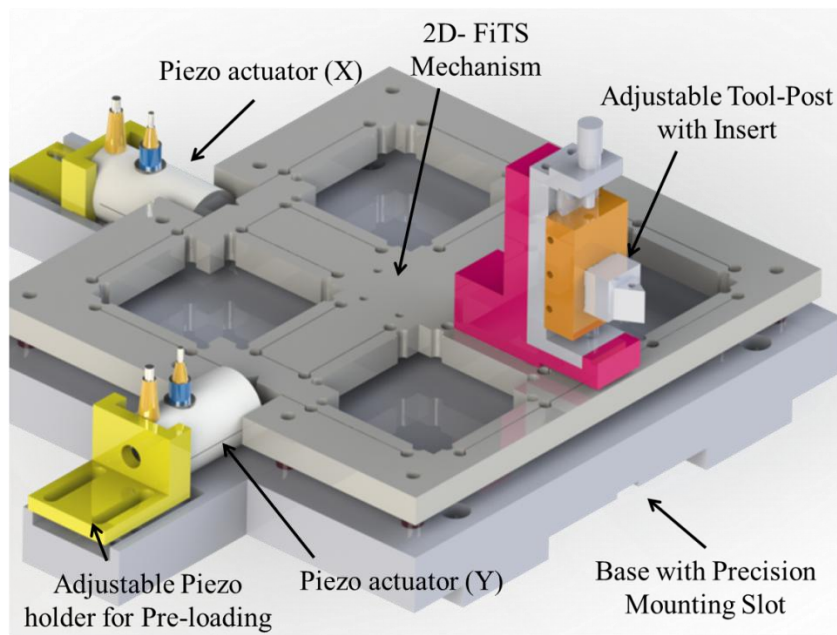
CAD model of the developed dual-axis FiTS system assembly
